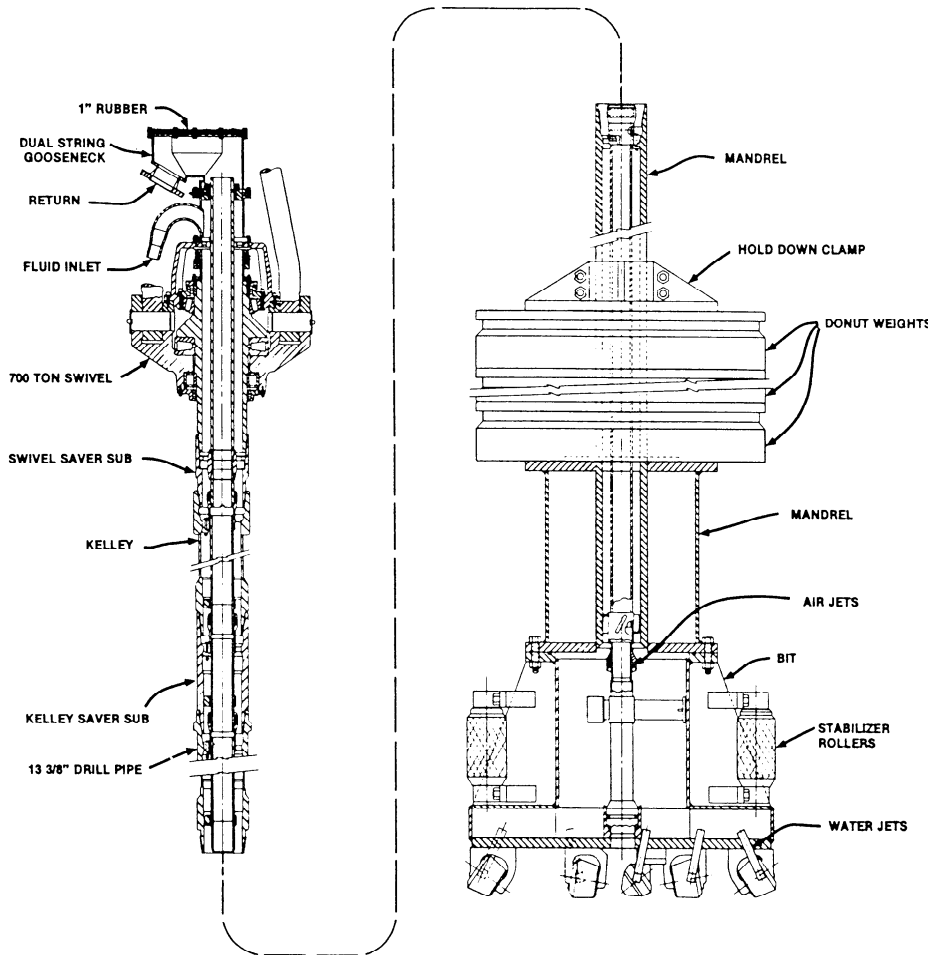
Kelly and swivel together with the bottomhole assembly (from Lackey, 1983).
